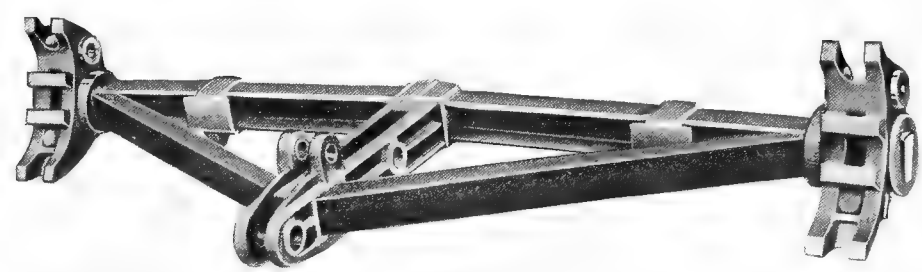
Huntoon P. C. Passenger Brake Beam. Joliet Railway Supply Company.
